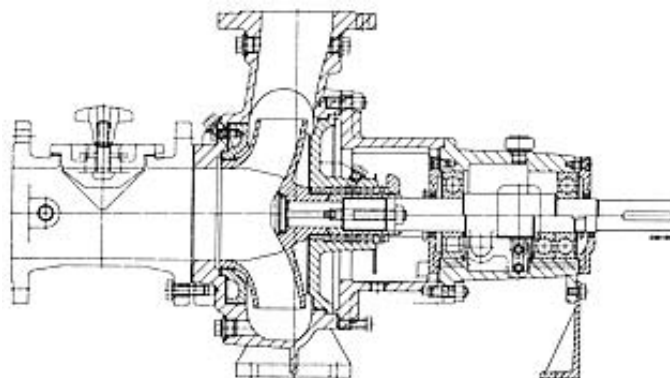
Horizontal sewage pump with open non-clogging impeller
